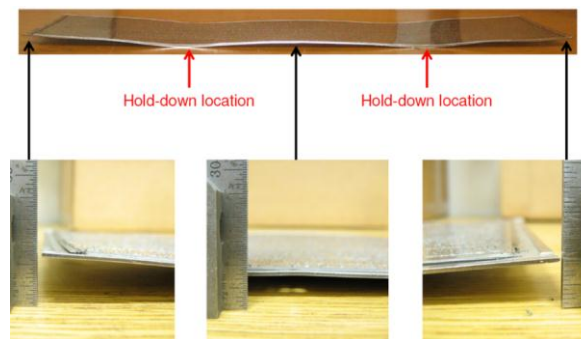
Deformation in laser welded assembly with current fixturing
